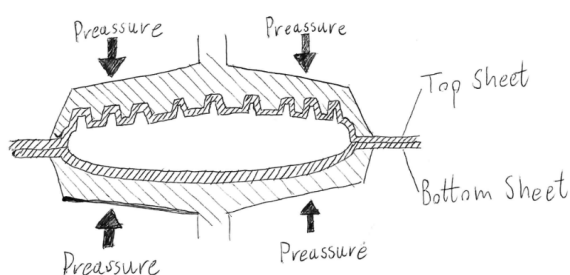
Pressure being applied on two formed halves to create a weld
